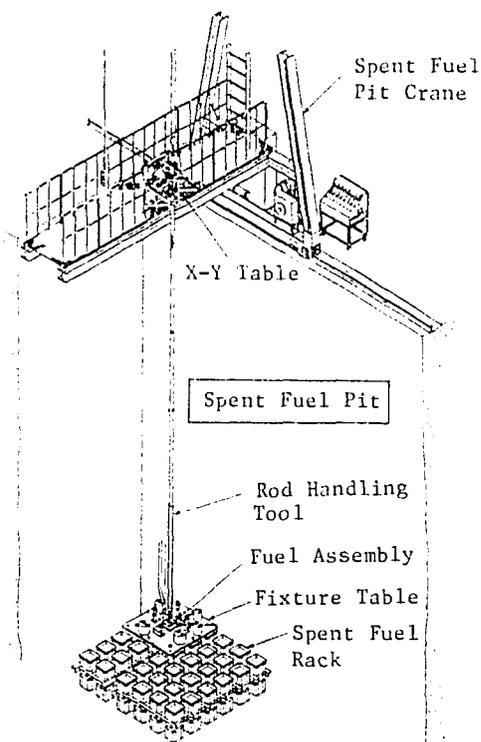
Disassembling and Reconstitution Equipment for Fuel Assembly
